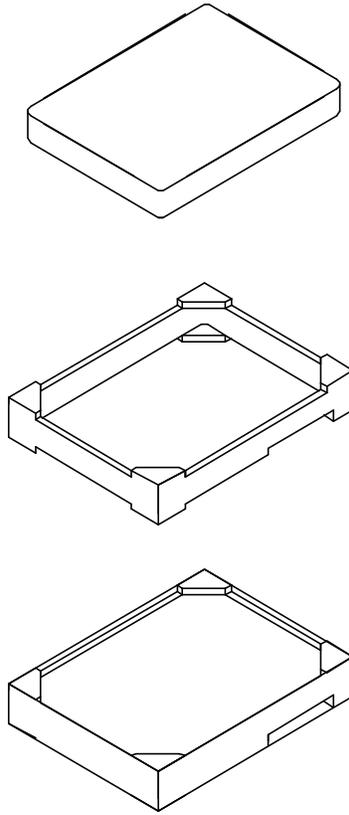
30x40mm <5mm Form Factor Drawing
